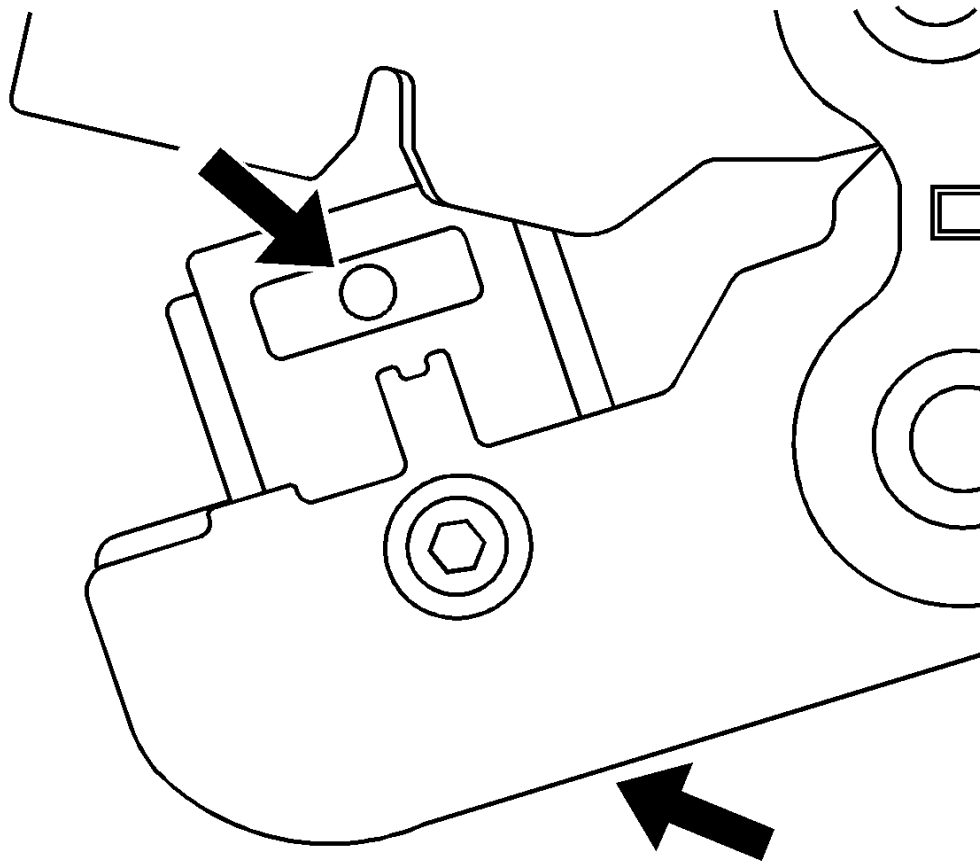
Identifying Crimping Tool Spring Loaded Locator
